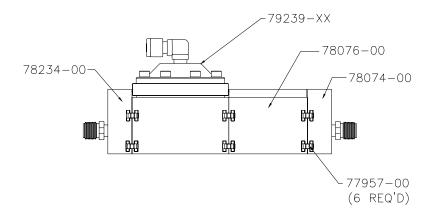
78235-00 Regulator & Flow Meter Stand-Alone Assembly
